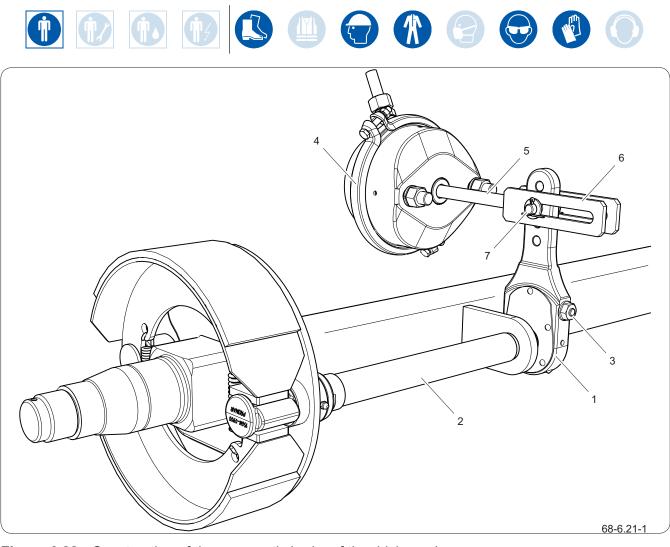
Construction of the pneumatic brake of the driving axle(1) expander arm,(2) expander shaft,(3) adjusting screw,(4) pneumatic cylinder,(5) cylinder,(6) cylinder fork,(7) cylinder pin(3) adjusting screw,
